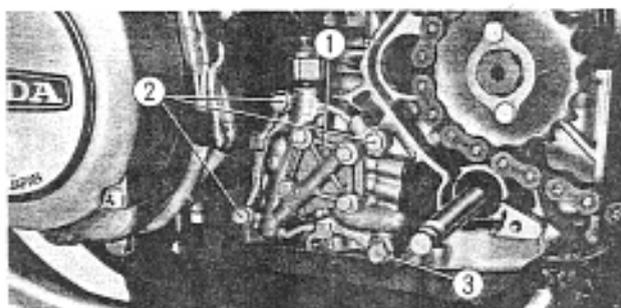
① Oil pump ② 6 mm bolts
